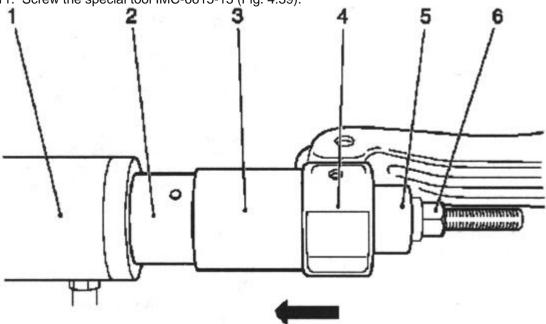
Extrusion back damping Bushings: 1,2,3,5,6 - a special tool, 4 - damping bush
